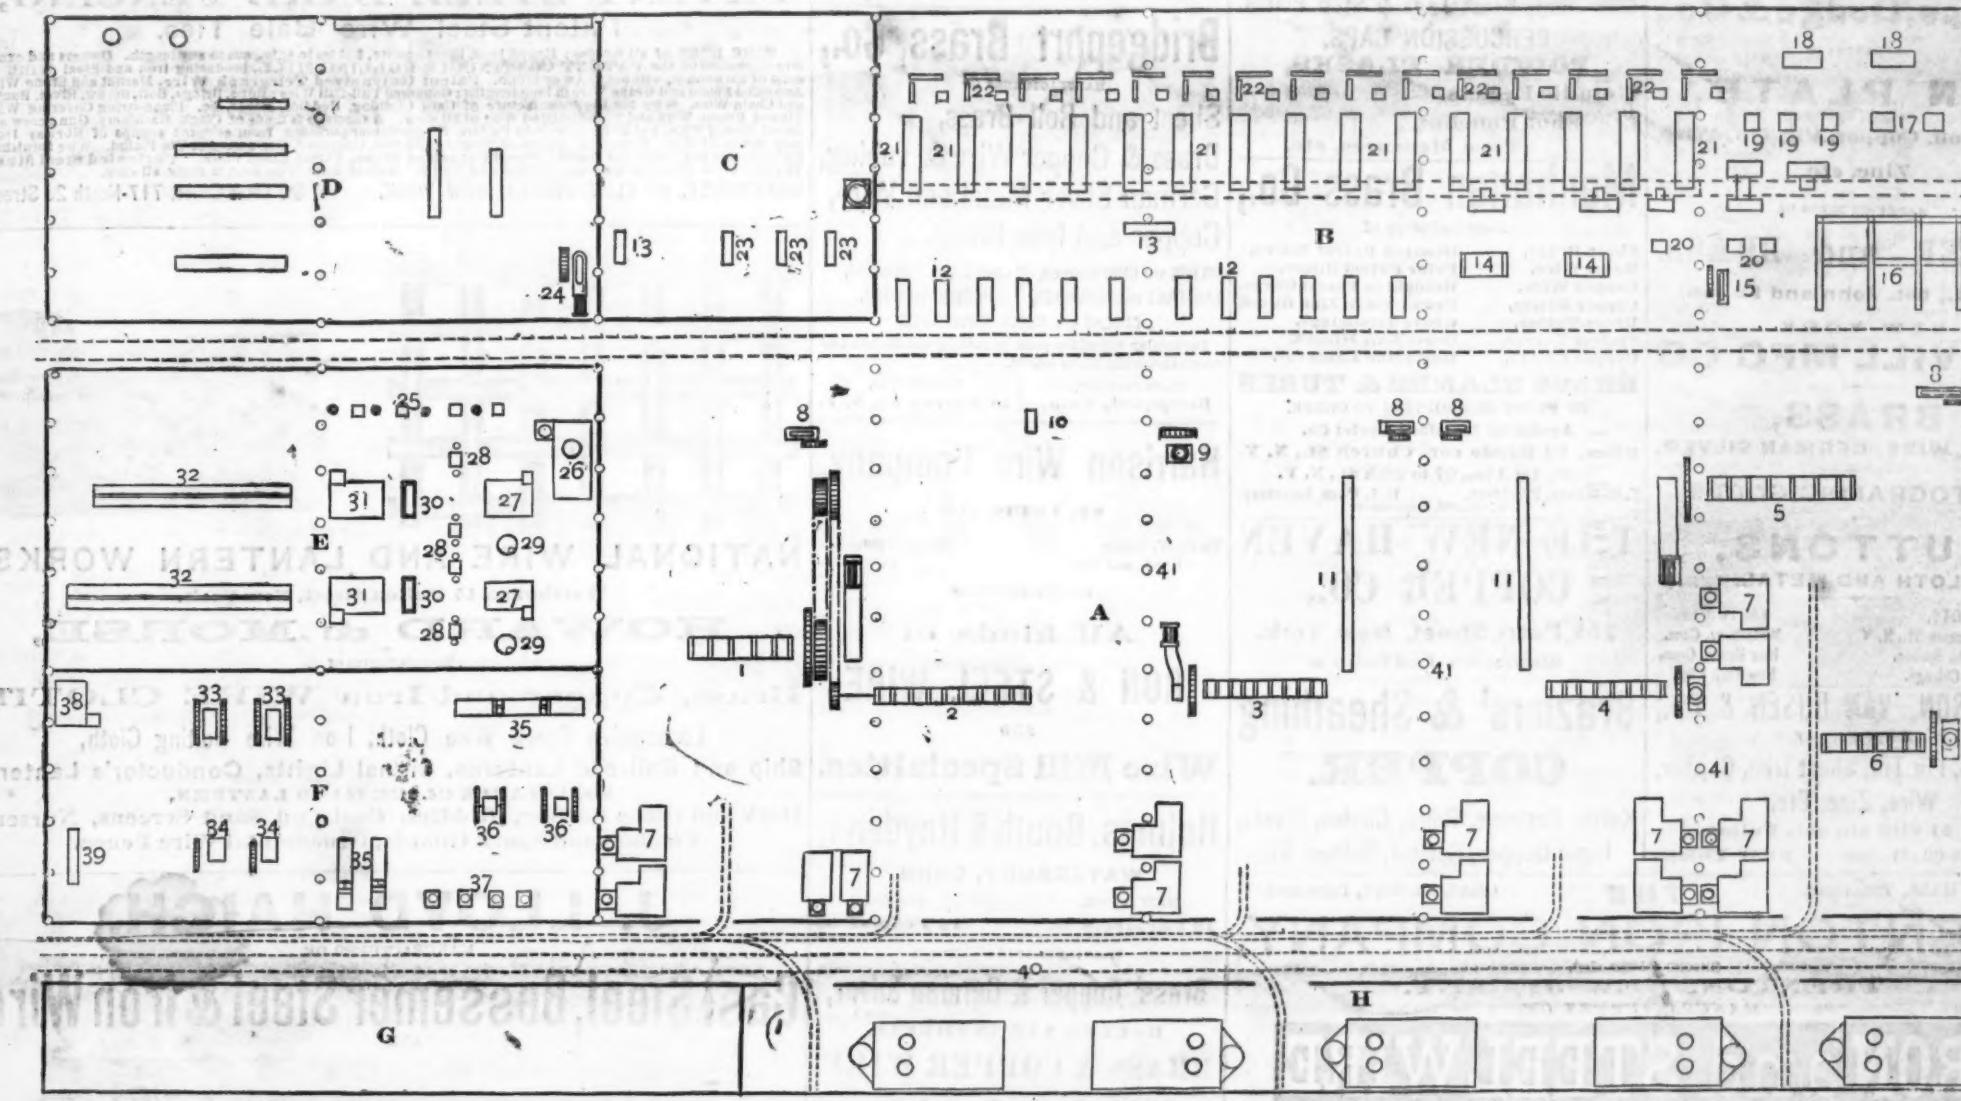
PLAN OF GAUTIER ROLLING MILL.
